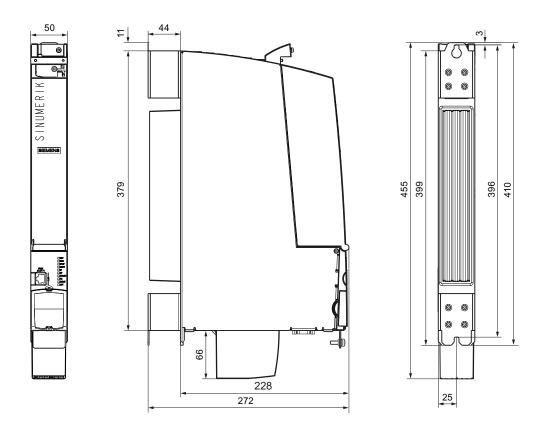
Dimension drawing NCU 720.3 PN and NCU 730.3 PN; dimensions in mm
